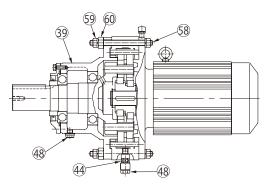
Type CHFM (Horizontal, Gearmotor), 1 Stage Reduction (Example: Frame size 6165)
